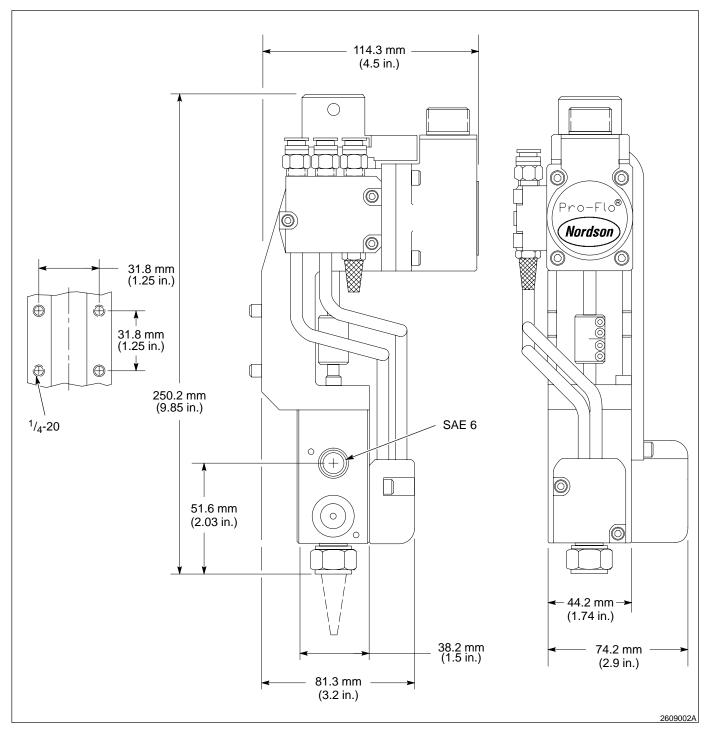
Pro-Flo II Extrude Dispensing Gun
